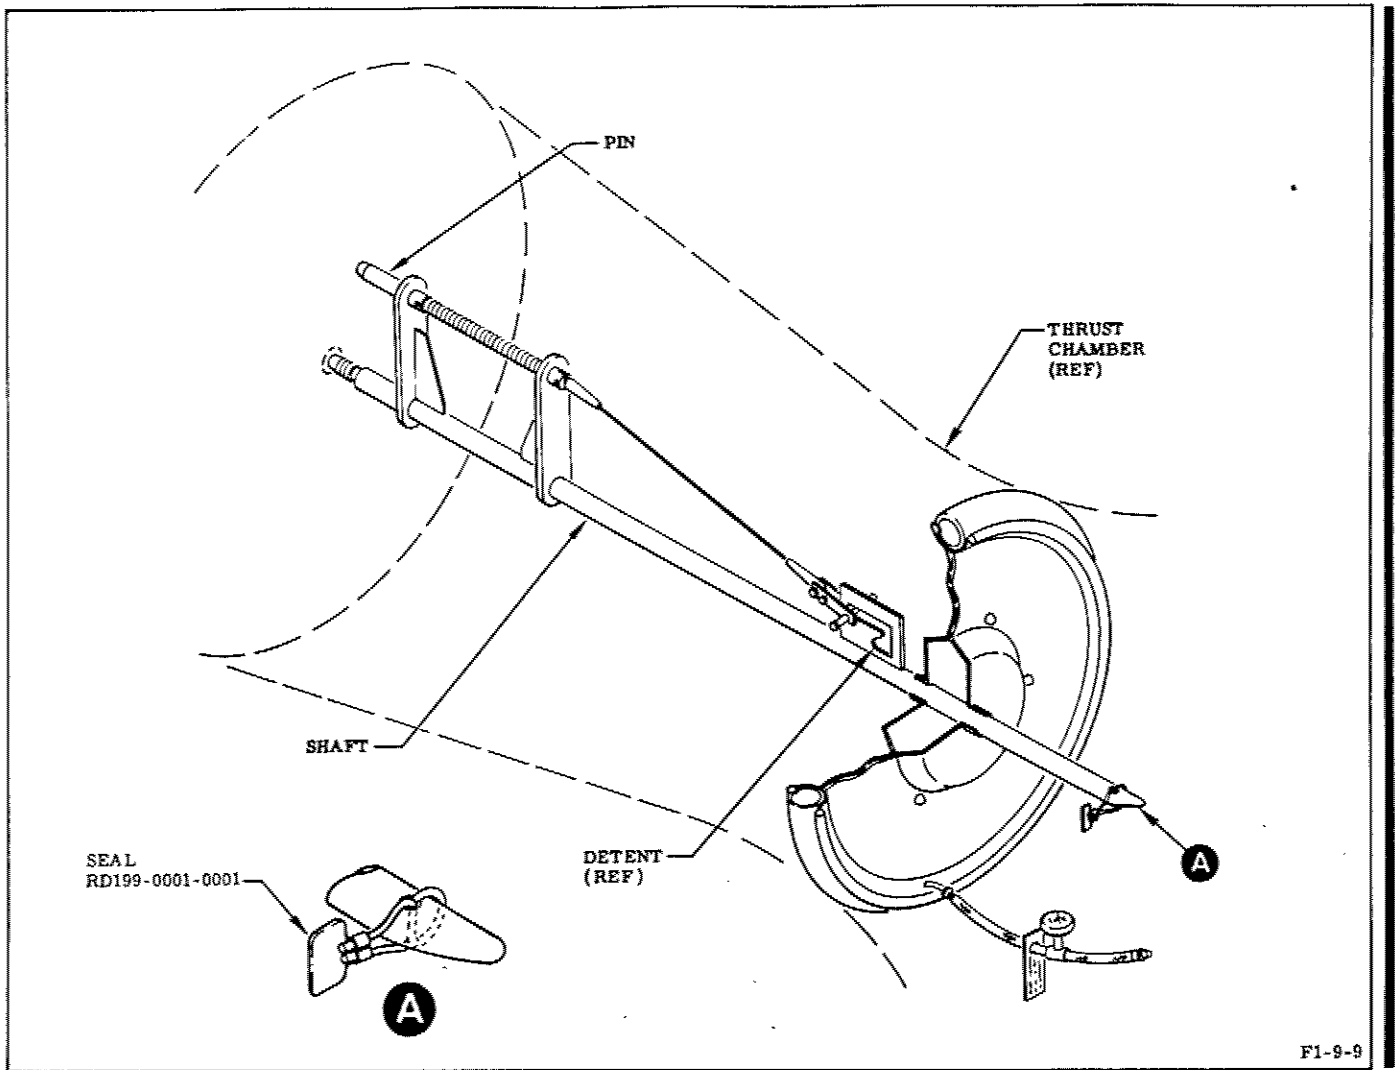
Installing Thrust Chamber Throat Security Closure
